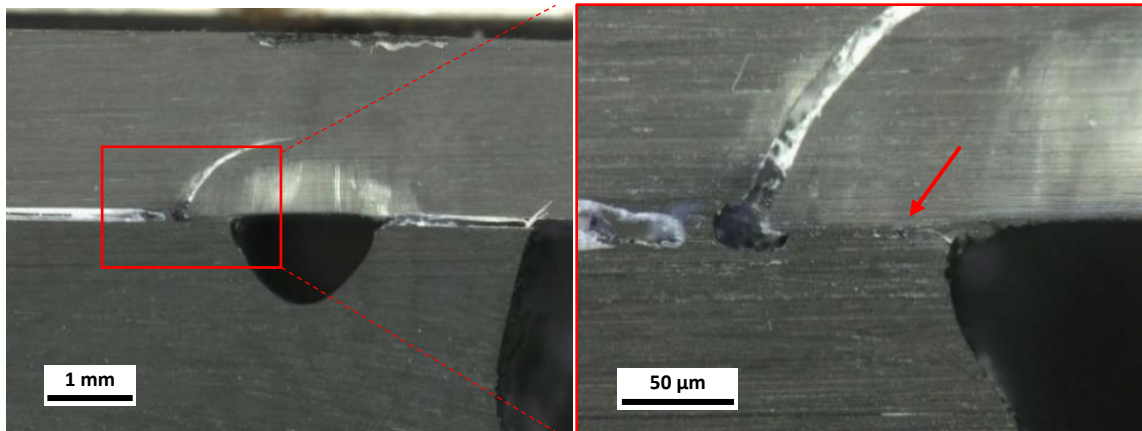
Weld deposit 50/200 The joining of materials occurred only on the left side of the channel
